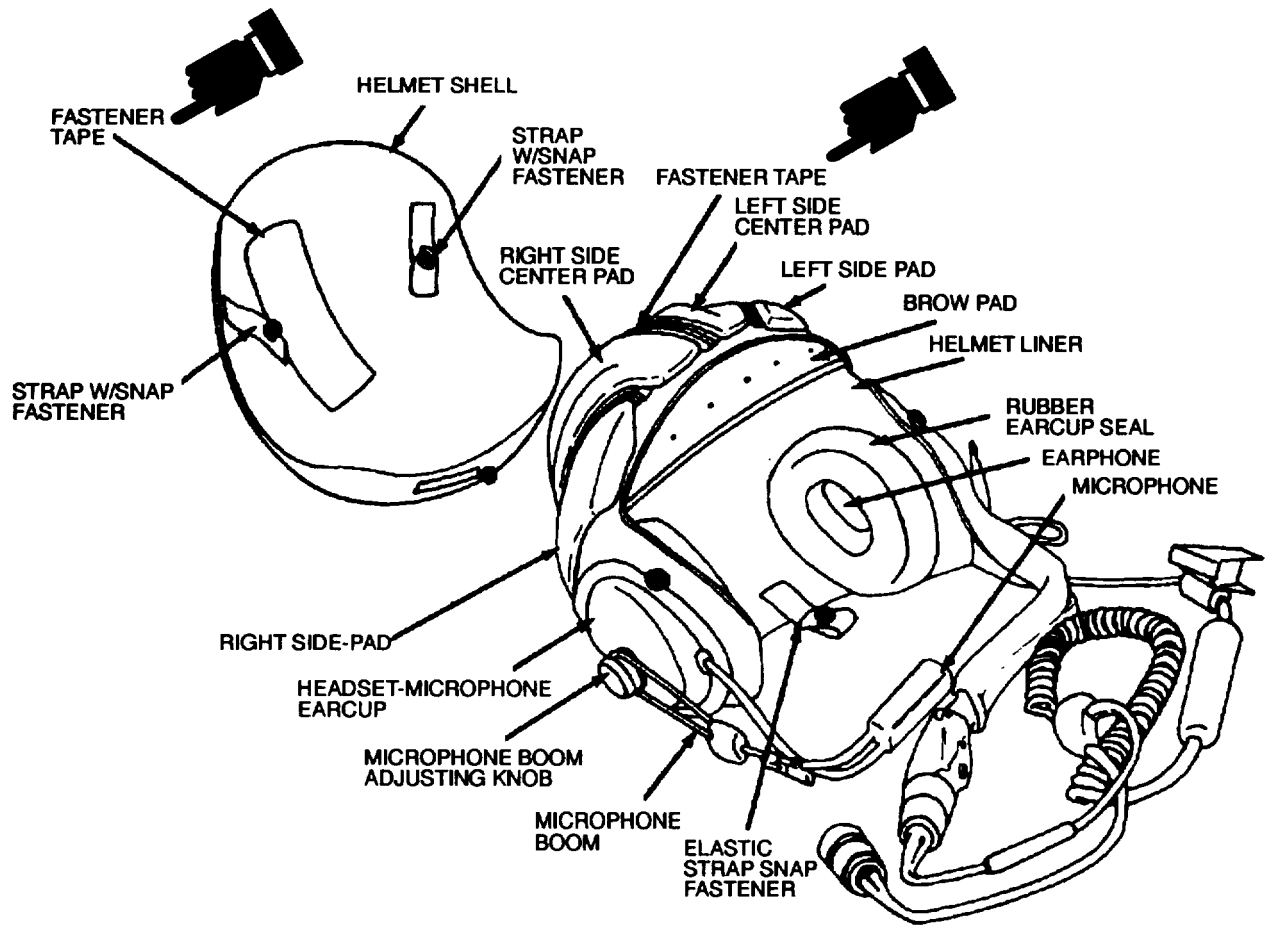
Helmet model DH-132, right front view with liner removed.
